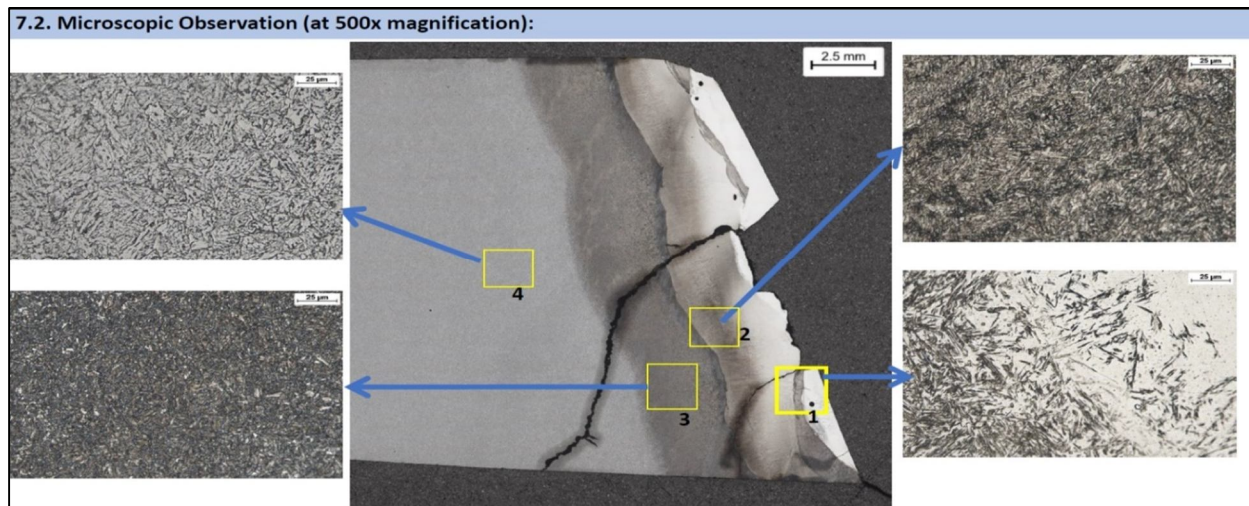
Fatigue crack initiation nearby wear pad of sleeve.
